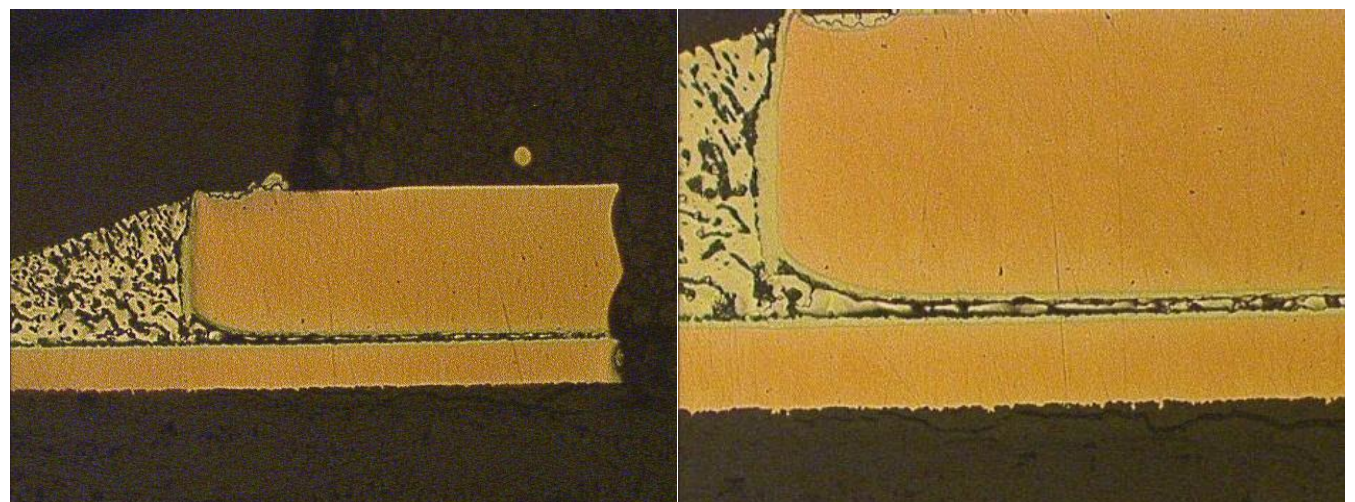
QFN-20 Solder Joints, Board 107, Component U28, SN100C/Sn, Reworked with SnPb Paste, 1 Rework Failed @ 277 Cycles
